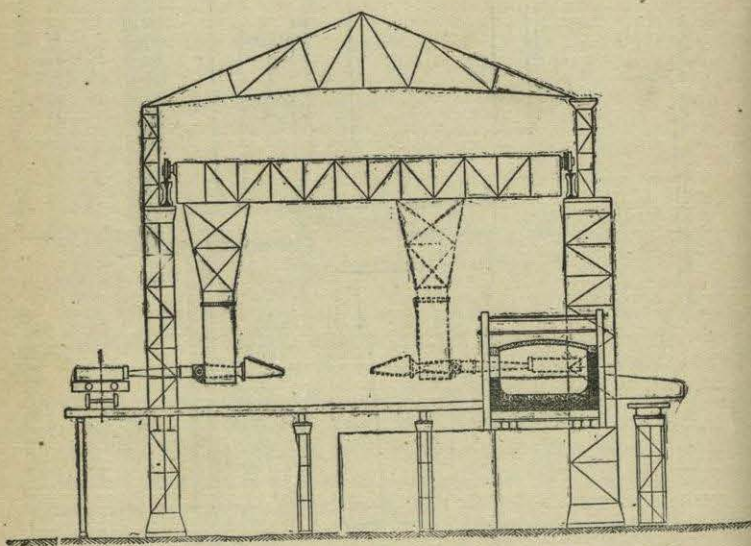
Overhead Wellman-Seaver Charging Machine, with Slewing Motion.
